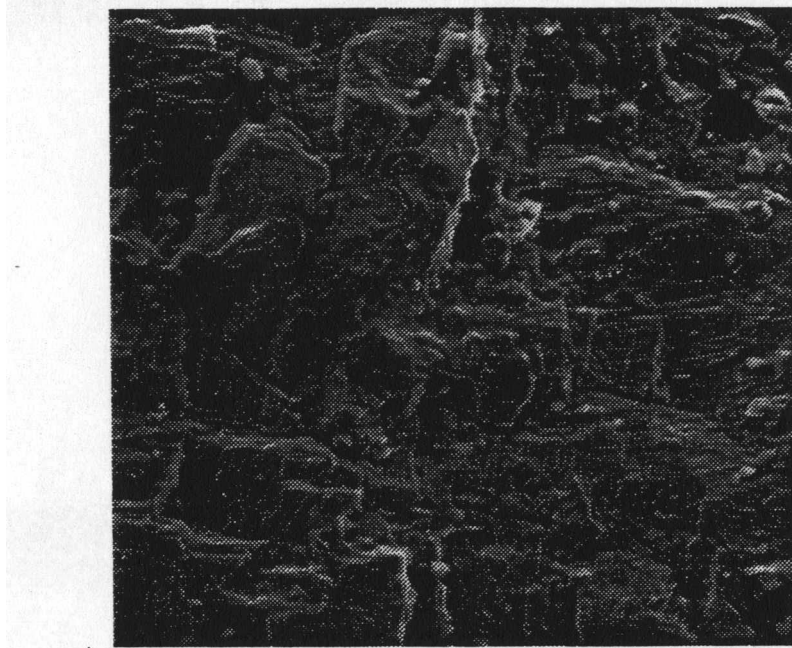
SEM Fractograph at 600X of Fracture Surface of Eggers Plate.
